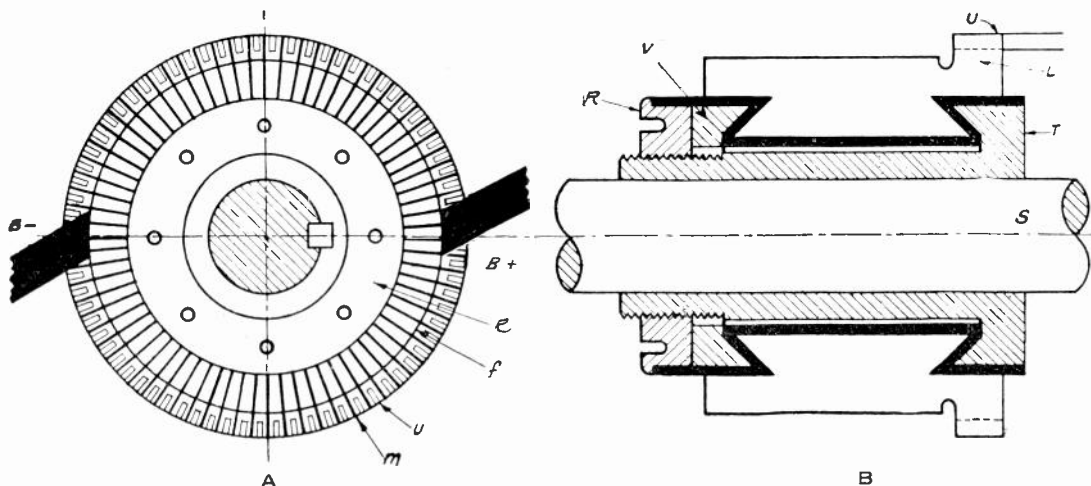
At "A" is shown an end view of a commutator, illustrating the manner in which the bars or segments are assembled and kept separated by strips of insulation between them. At "B" is a sectional view showing how the commutator segments are clamped and held in place by clamping rings which fit in their grooves.
